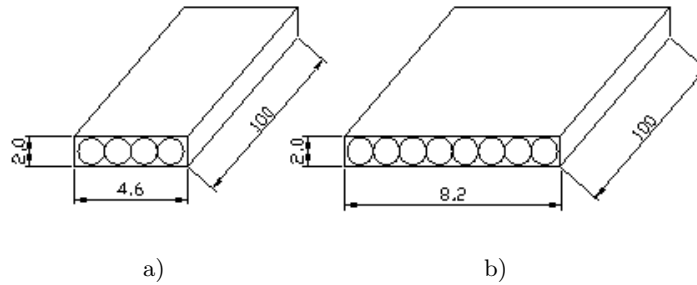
Dimensional diagram of the testing minichannels bundles: a) MULTI-4, b) MULTI-8.
